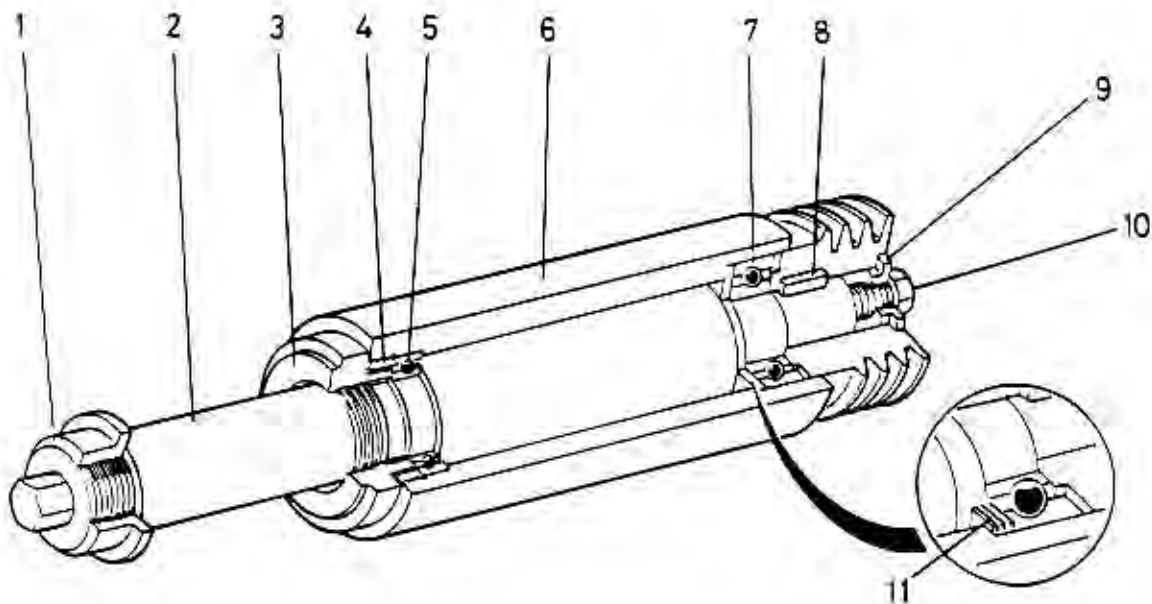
TOP HEAD SPINDLE UNIT - 40MM DIAMETER SQUARE SHOULDER
